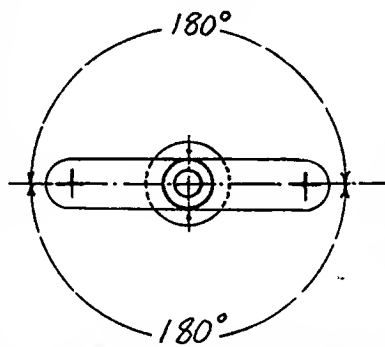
Diagram showing relative positions of the crank pins of a four-cylinder motor, with flywheel flange in rear. Shaft viewed from front end.
